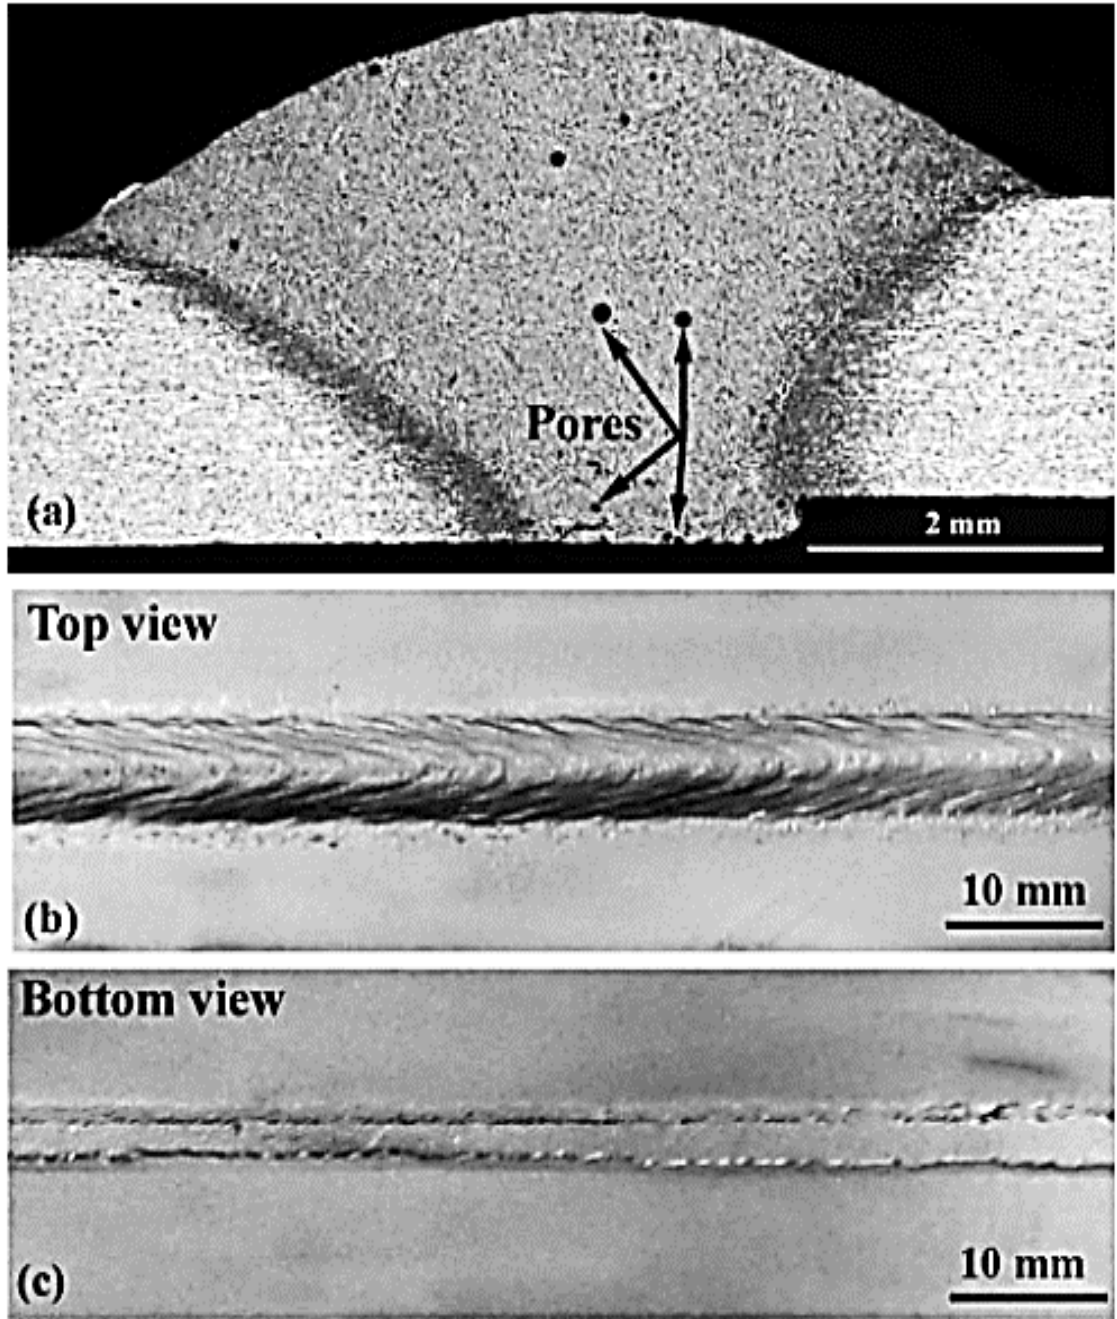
Cross section macrostructures of CMT joint shows (a) porosities, and surface appearance of weld (b) top view and (c) bottom view (Elrefaey 2015)
